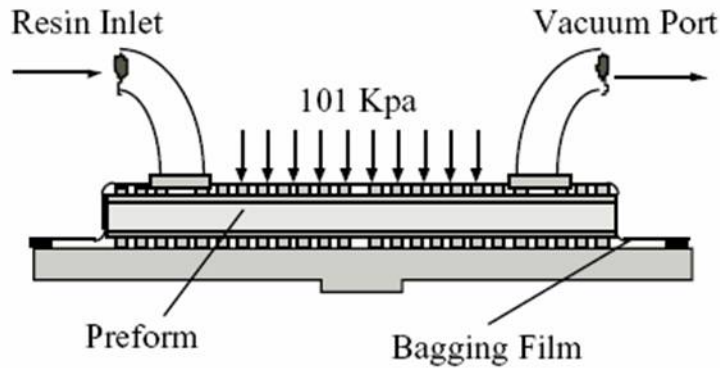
Vacuum Assisted Resin Transfer Molding (VARTM)
